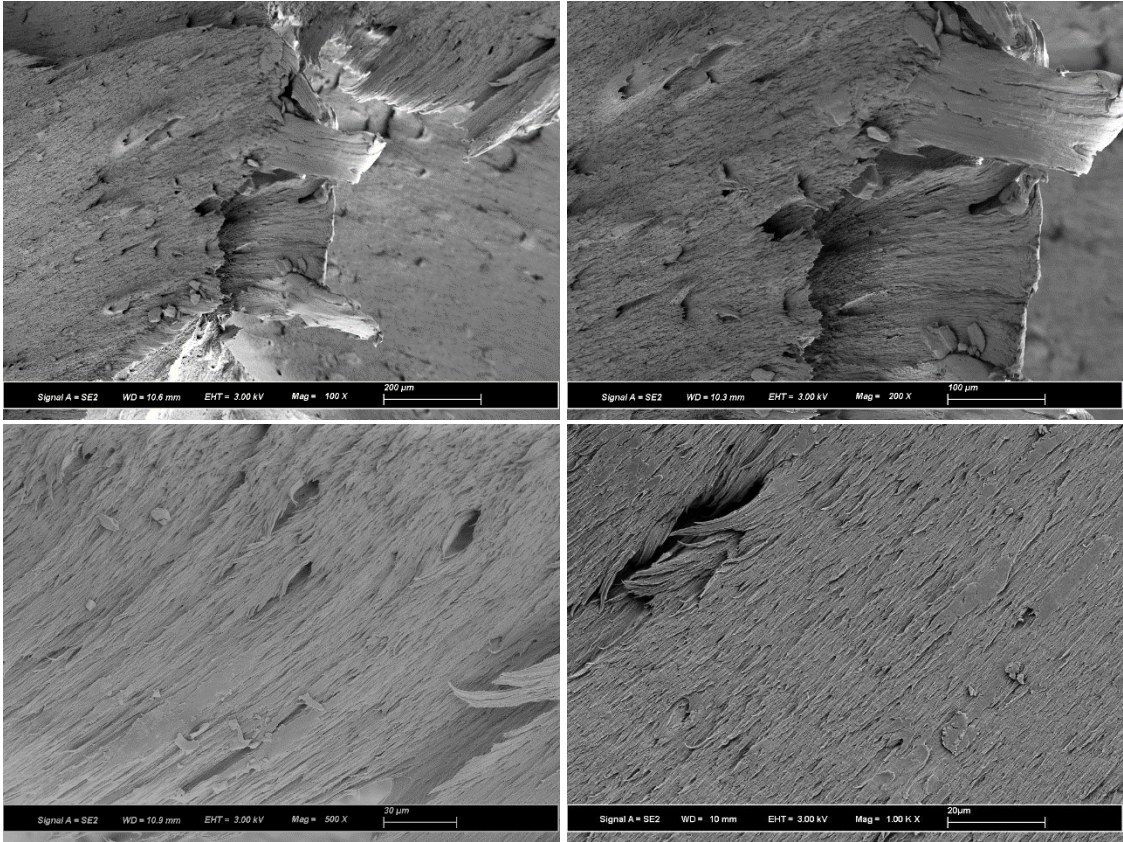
Selected tensile fracture surface images of AN₉ printed samples.
